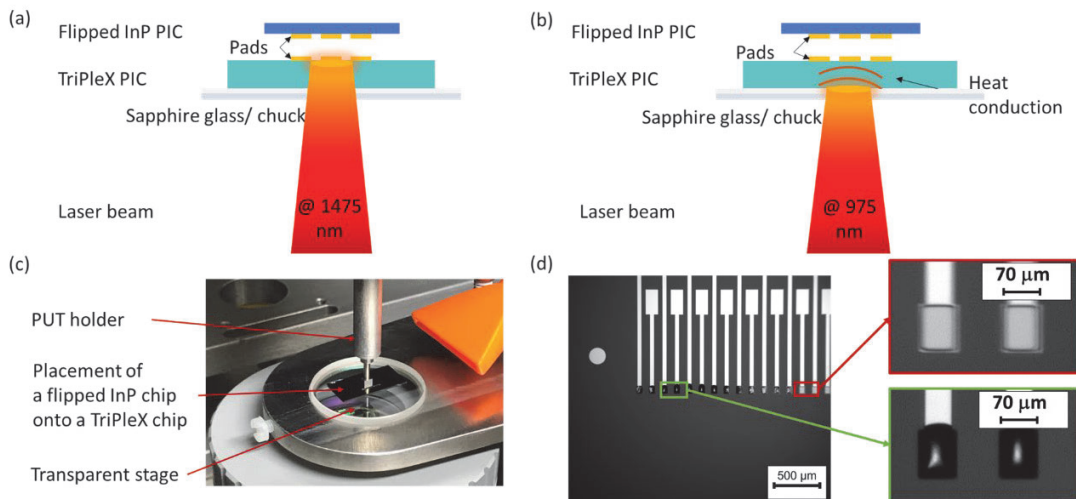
Technology, setup, and assembly process: (a, b) Schematic of through-silicon laser soldering and heat conduction laser soldering; (c) Image of a flipped InP chip held by a pick-up-tool (PUT) and placed on top of the TriPleX chip on a transparent stage; (d) Microscope image of 16 bonding pads with eutectic AuSn solders on a TriPleX chip; the top enlarged view shows two bonding pads with original solders, the bottom one shows two bonding pads with reflowed solders after laser illumination.
